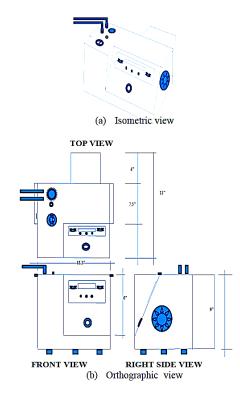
Various Views of the Vacuum -Type Brake Fluid Bleeder and Recovery Machine (VBFBRM)
